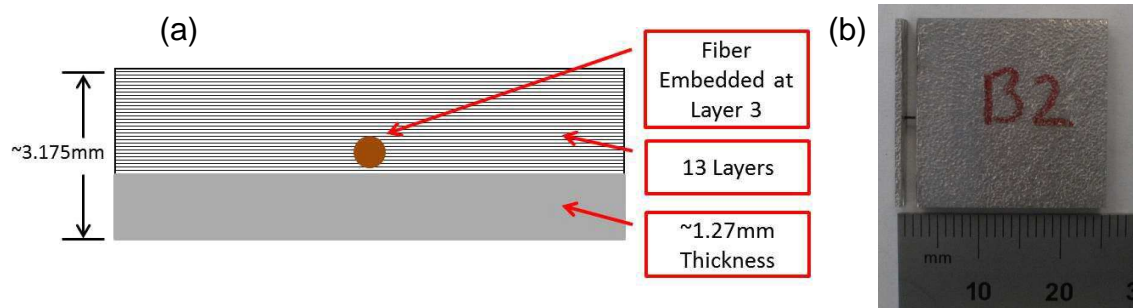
Sample details: (a) schematic of sample cross section with key fabrication details; (b) physical sample ready to test post manufacture.
